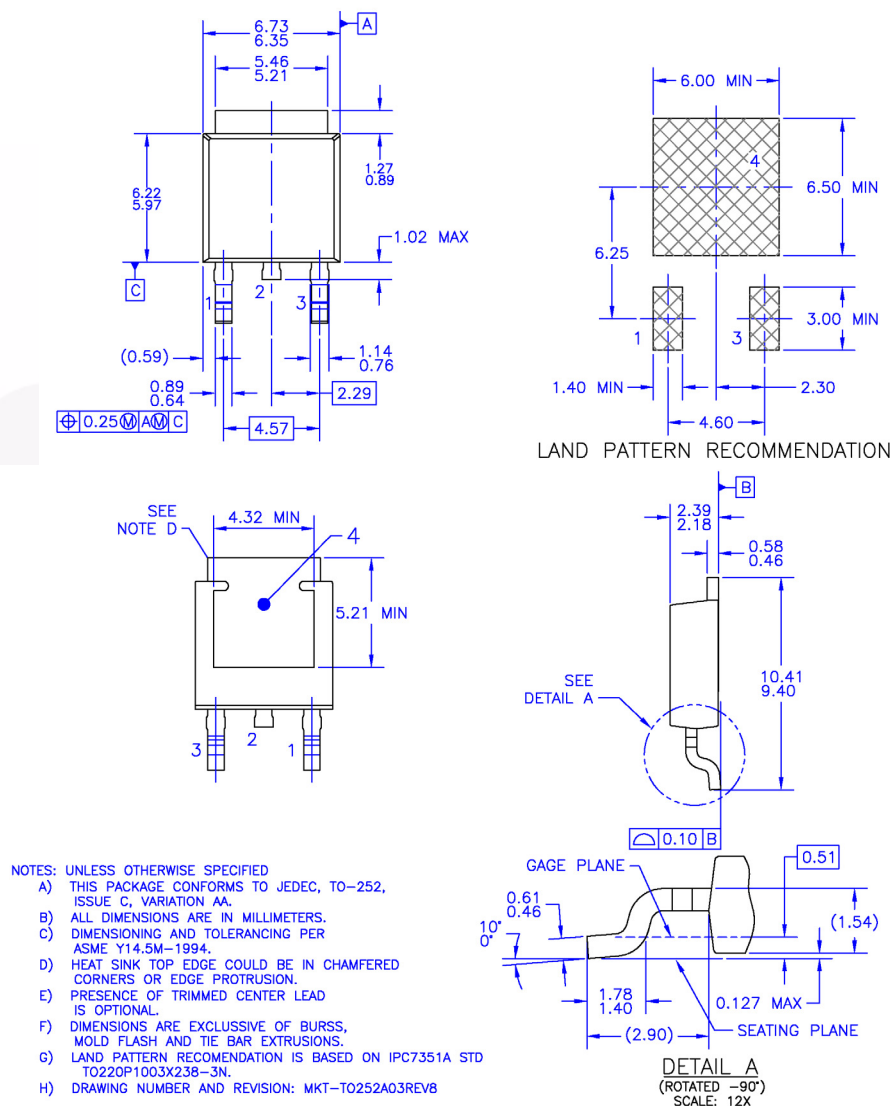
TO-252 3L (DPAK) - TO252 (D-PAK), MOLDED, 3 LEAD, OPTION AA&amp;AB
